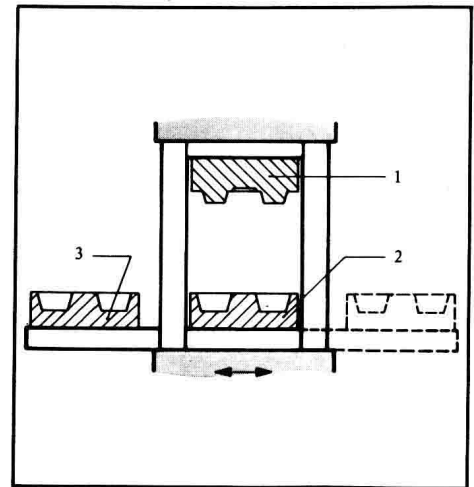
2-sided sliding table: Injection runner in the mould parting line. Upper mould plate (1). Two identical bottom mould plates (2 +). Hydraulic lifting device and/or hydraulic centre ejection on shuttle tables possible. (D966.080 G)
